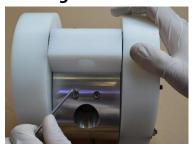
Unscrew the diaphragm [15] from one side of the pump.
